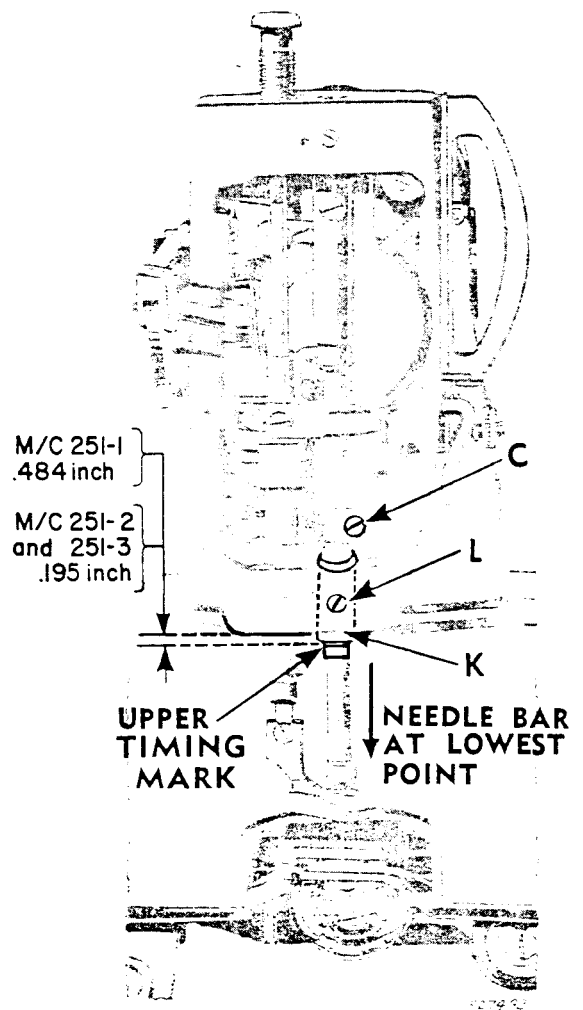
Setting Needle Bar Height on Machines with Timing Marks Aligned with LOWER Needle Bar Bushing
